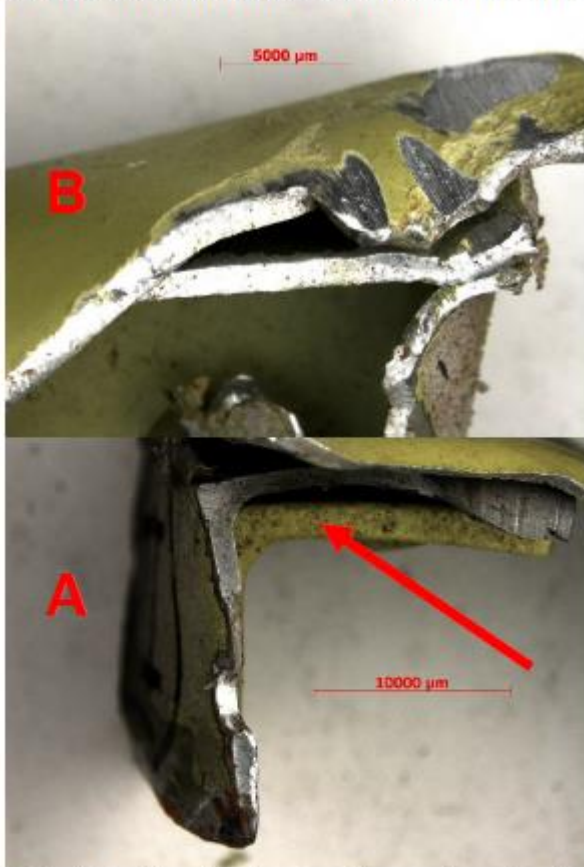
Sectioned fracture locations, outboard section (Stereo)
